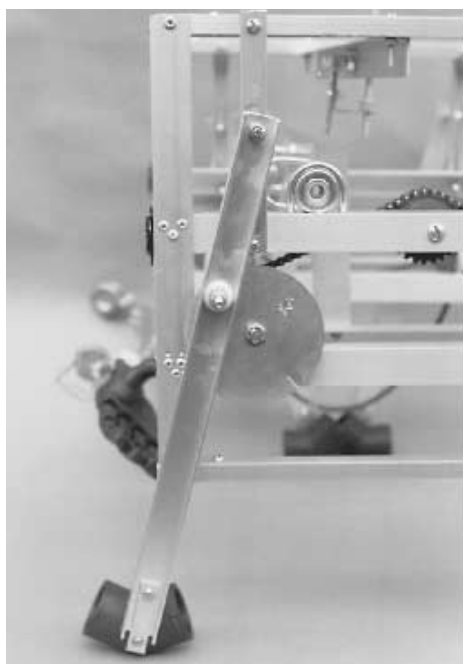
One of six legs, completed (shown already attached to the robot).
